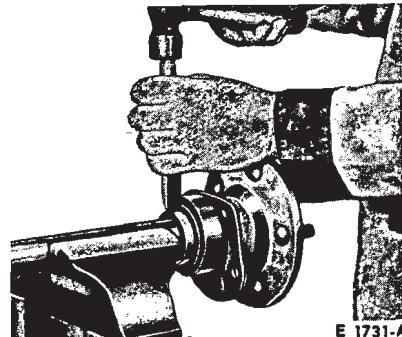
Removing Rear Wheel Bearing Retainer Ring
